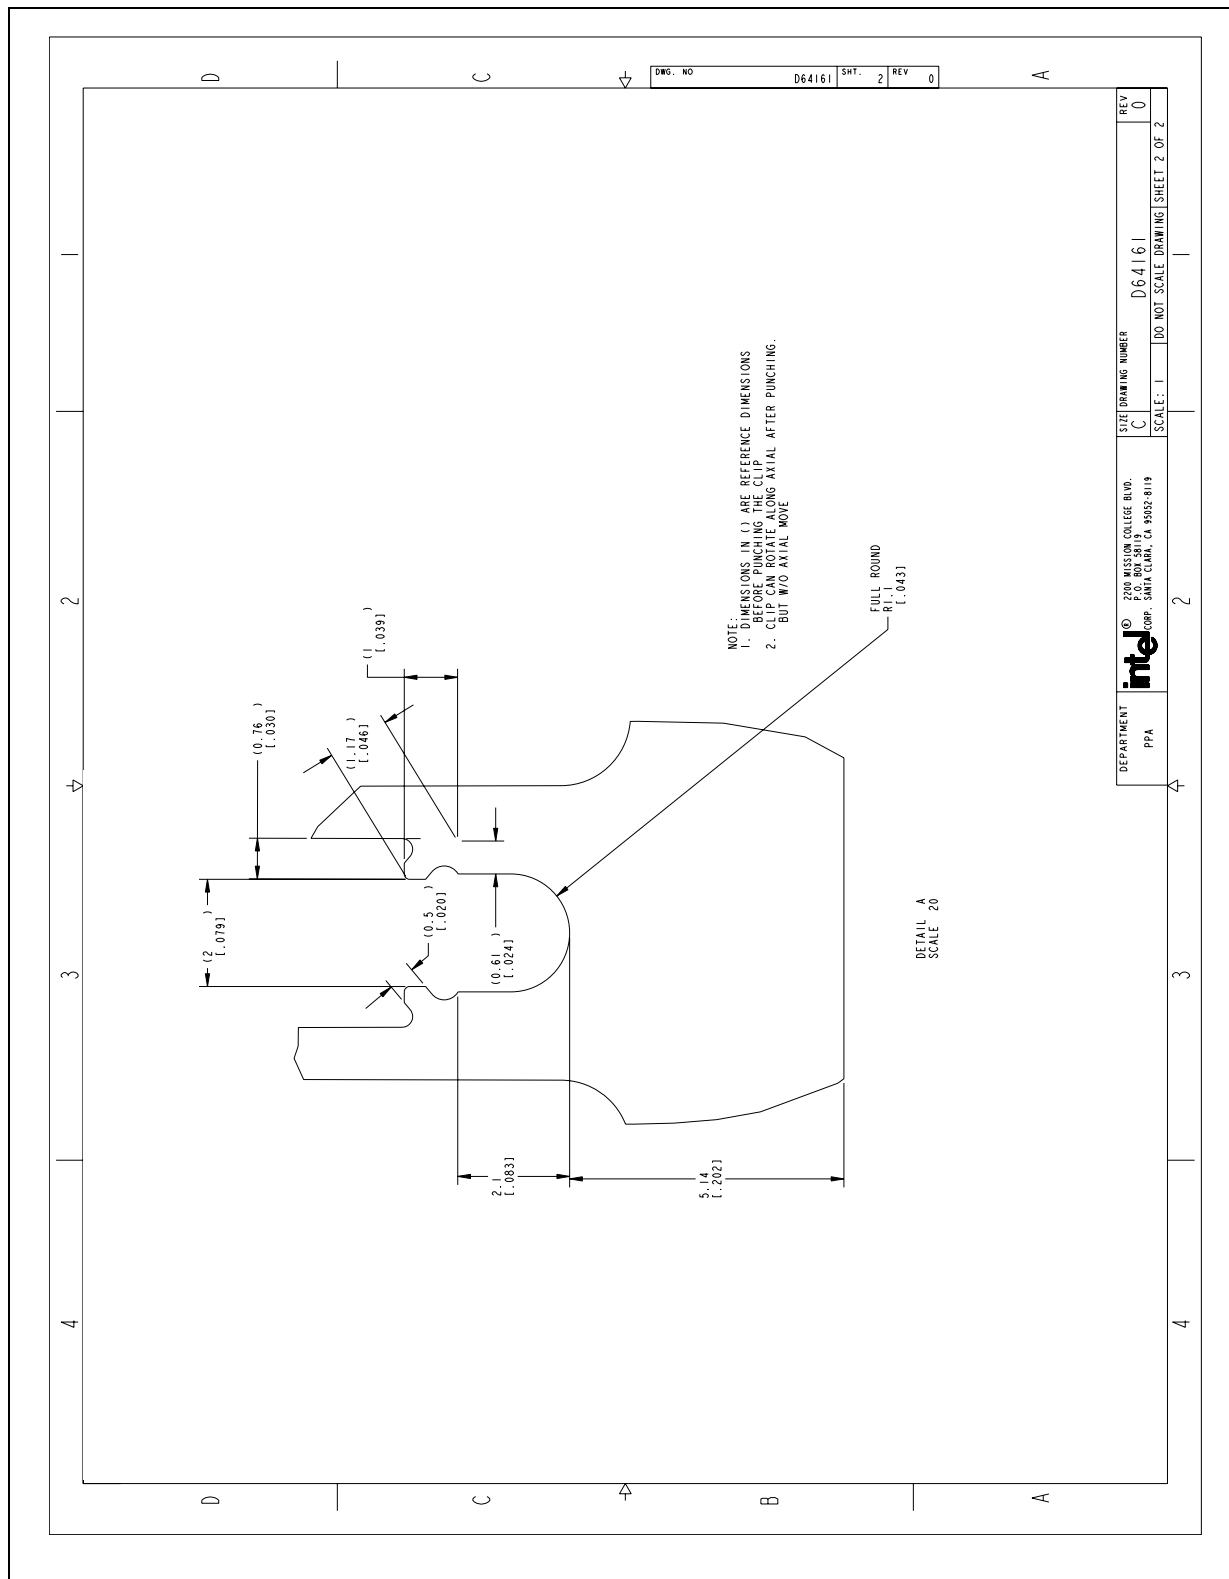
Intel 7300 Chipset MCH Heatsink Wire Clip Drawing
